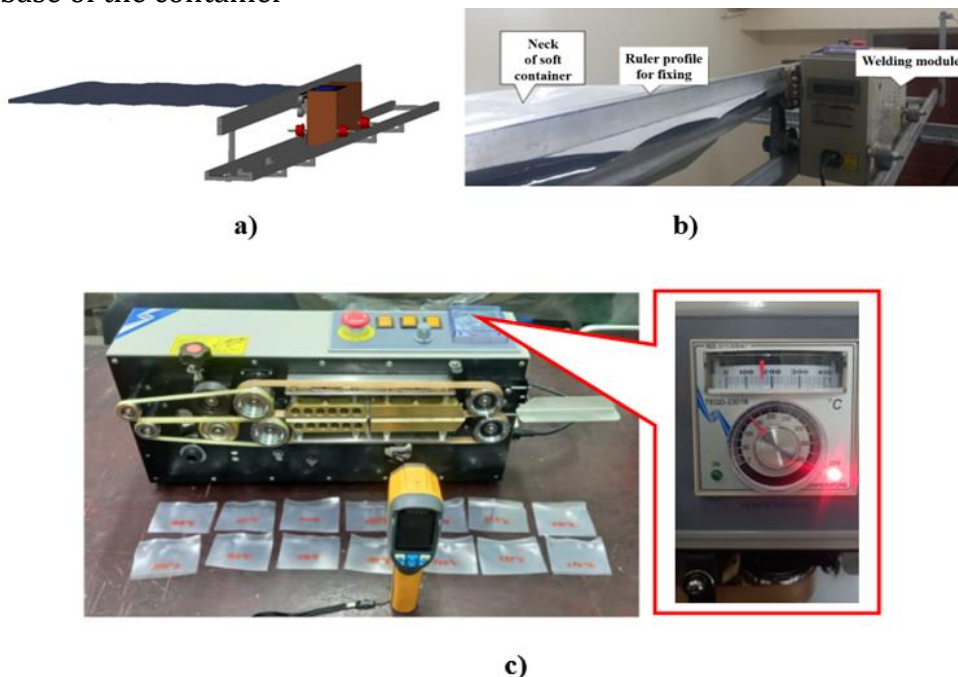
Welding of the neck of a flexible container with a self-propelled welding module, where a - diagram; b - general view of welding module; c - sealing machine «DBF-900W», thermal imager «Amtast AMF101» and sealed film samples «PE-115»
